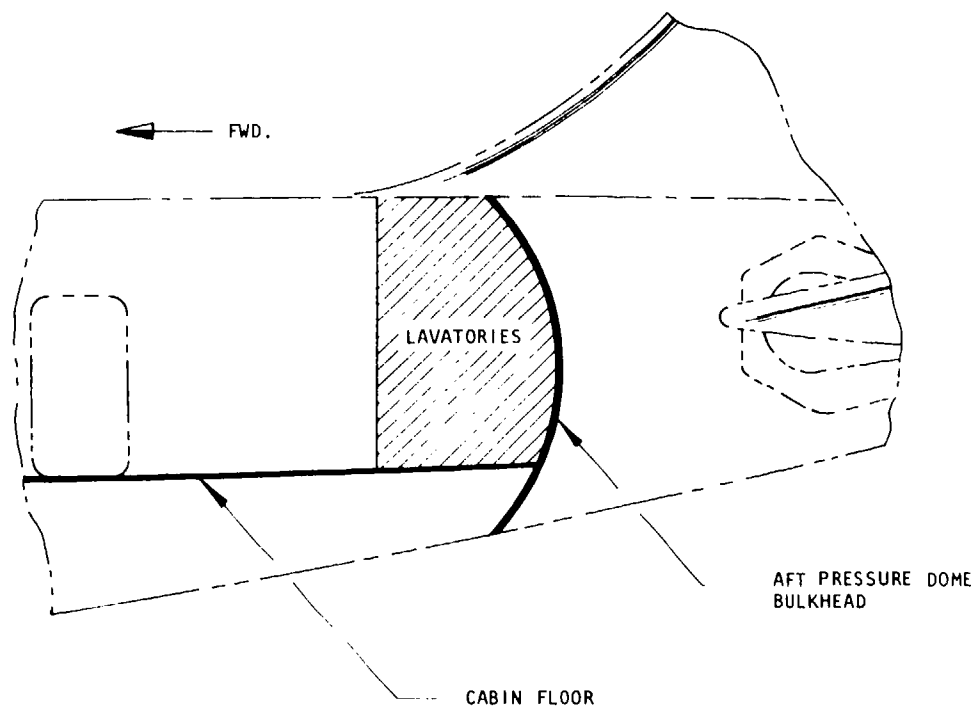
GENERAL VIEW OF LAVATORIES INSTALLATION
